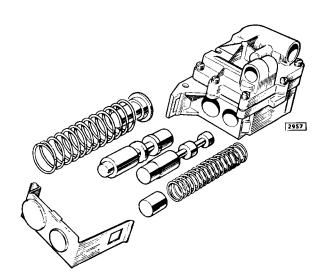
Regulator assembly. Valves, springs and retainer shown exploded
